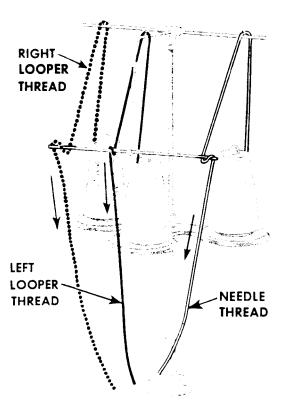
Unwinder 151031 Threaded for Three-Thread Stitch
